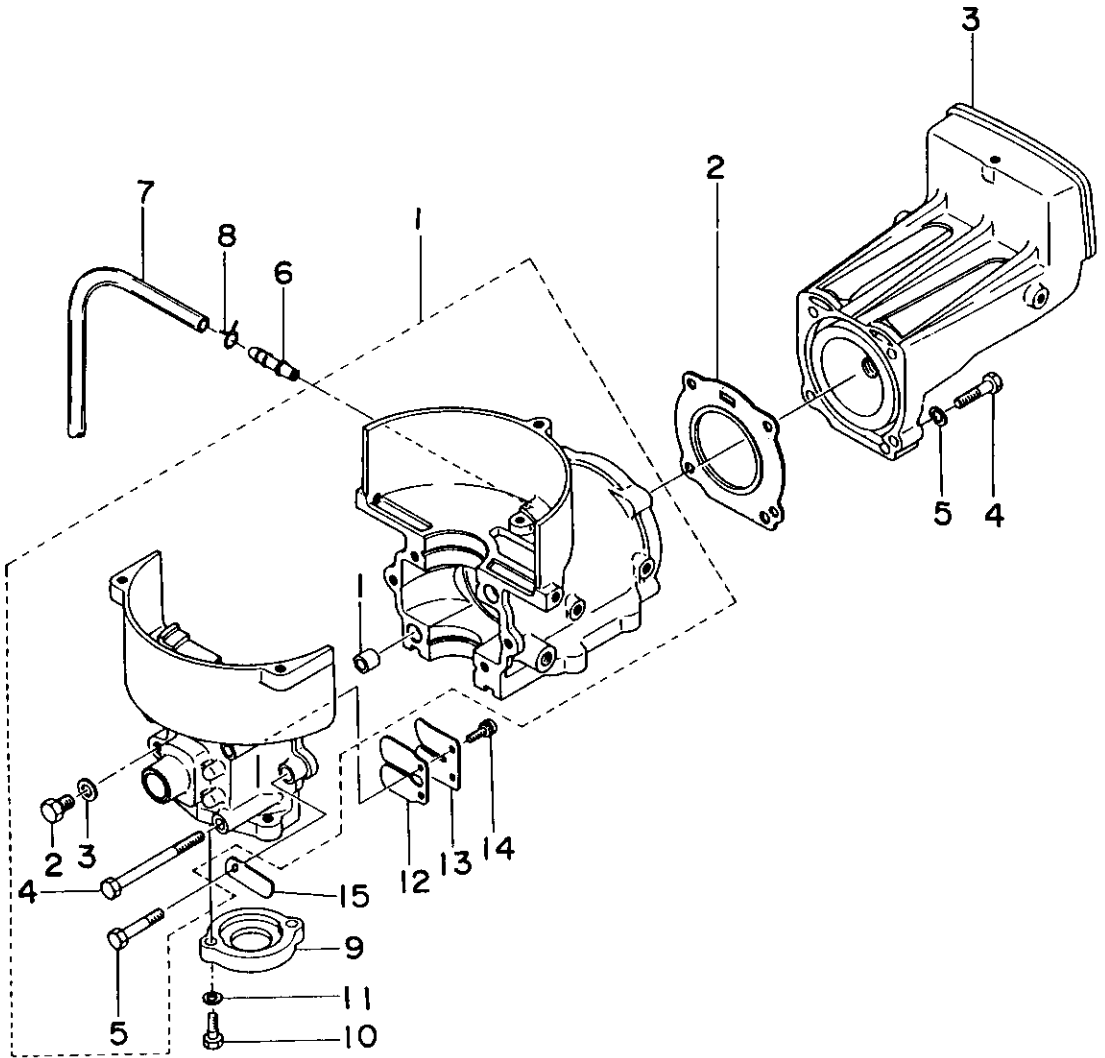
CYLINDER & CRANKCASE, REED VALVE
